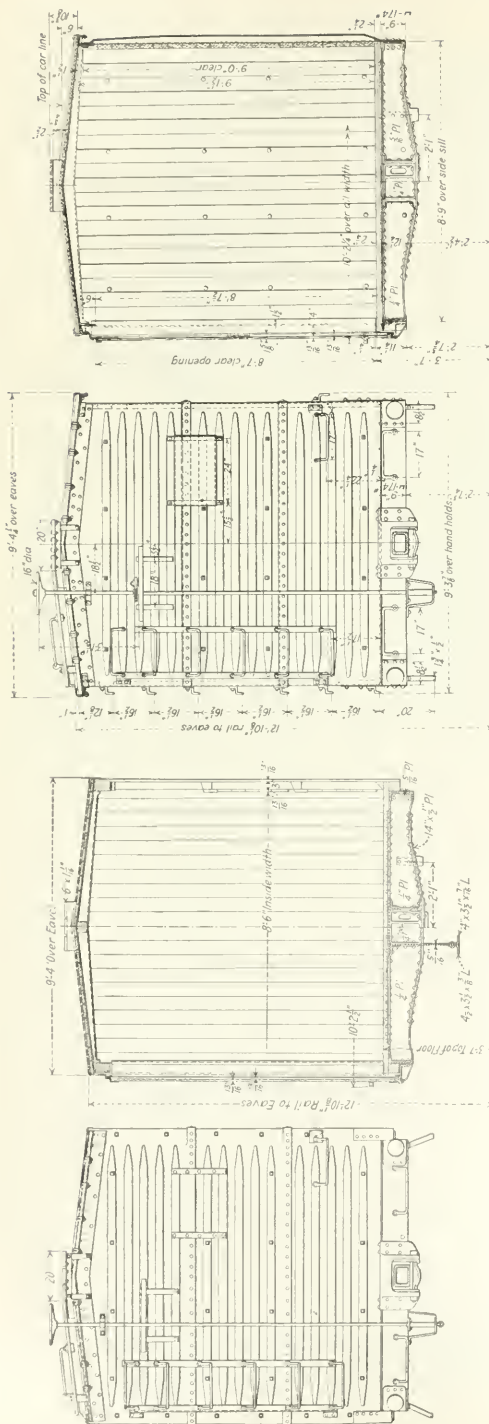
Sections of the 40- and 50-Ton Single Sheathed Box Car
